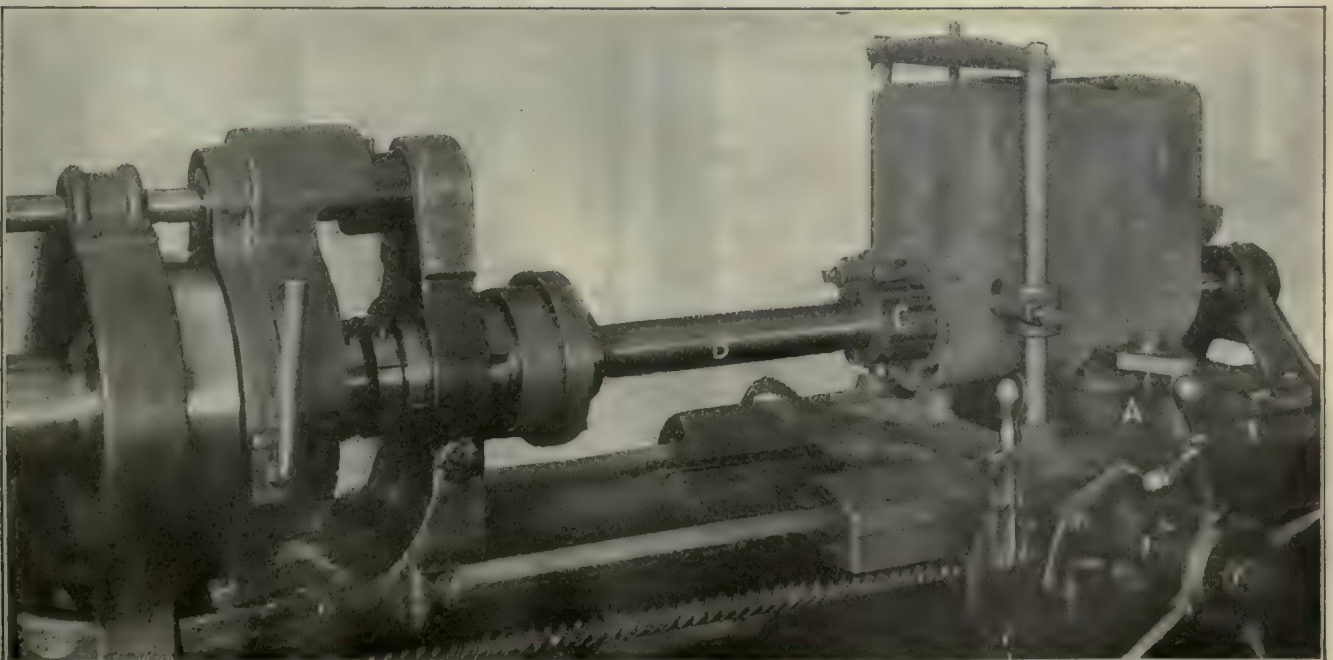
SPECIAL MACHINE FOR BORING AND REAMING CYLINDERS
